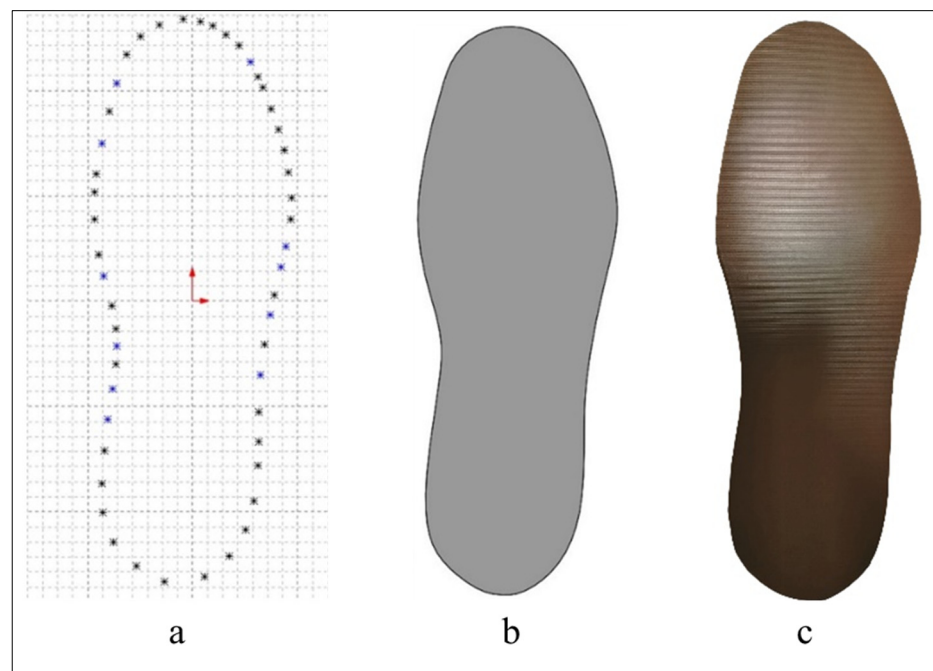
Geometrical modeling of insole: (a) insole sketch; (b) extruded (0.4 mm thickness); (c) 3D printed flexible insole.
